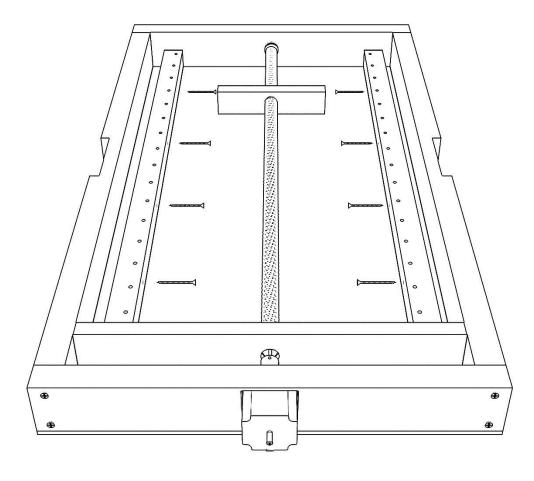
MOUNTING THE Y AXIS LINEAR GUIDE RAILS SUPPORT)
